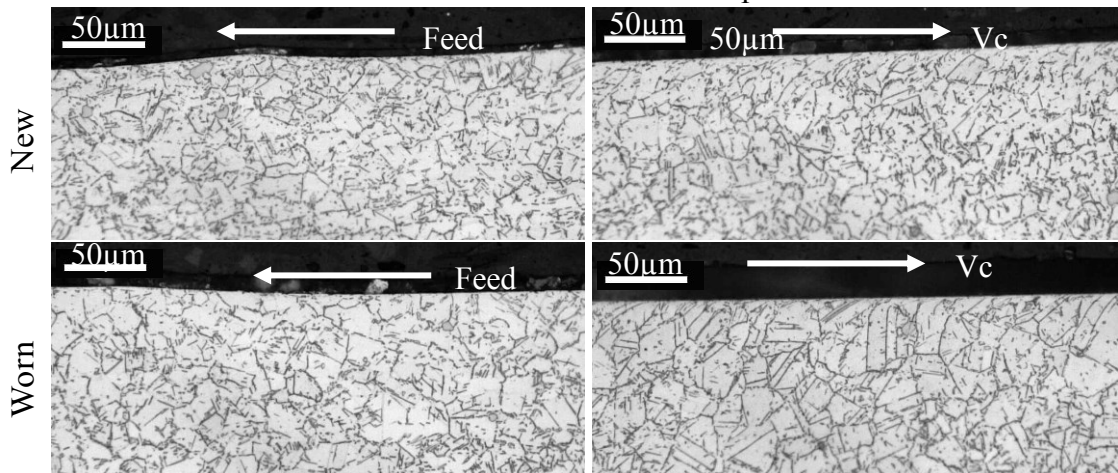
Cross sectional optical micrographs of machined workpiece sub-surface of Test 3 following turning with new and worn inserts
